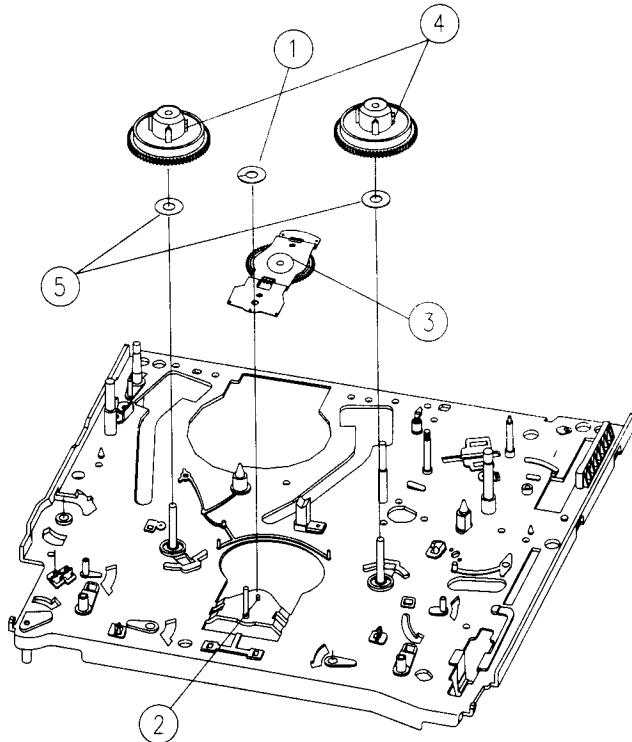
IDLER PLATE TOTAL ASS'Y & S/T REEL TABLES REMOVAL
